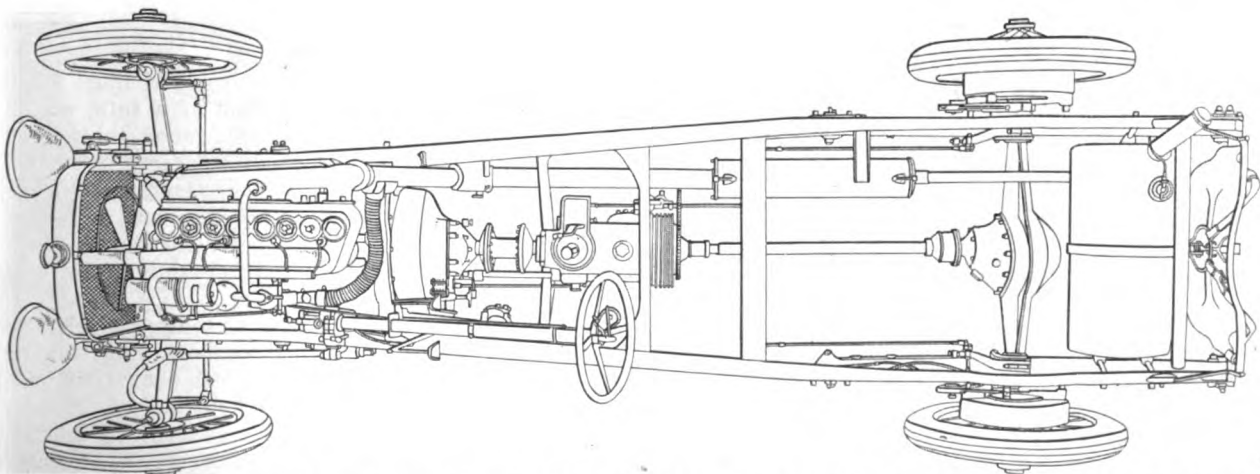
A PASSENGER CAR CHASSIS HAVING A VERY SIMPLE BRAKE LAYOUT IN WHICH THE BRAKE CAMSHAFT PASSES THROUGH THE TRANSMISSION HOUSING AND OPERATES AN INTERNAL CAM ON THE BRAKE BACK OF THE TRANSMISSION.
